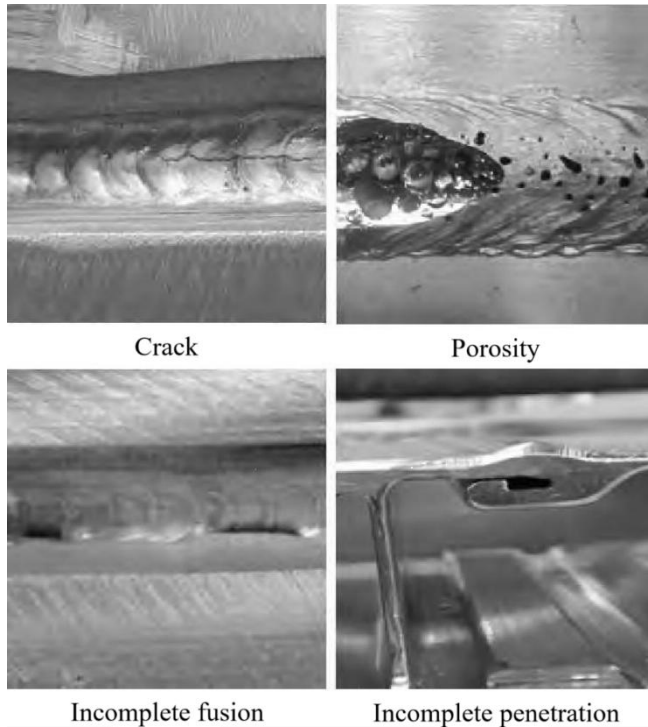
Common defects in MIG welding of aluminium alloys [4]
